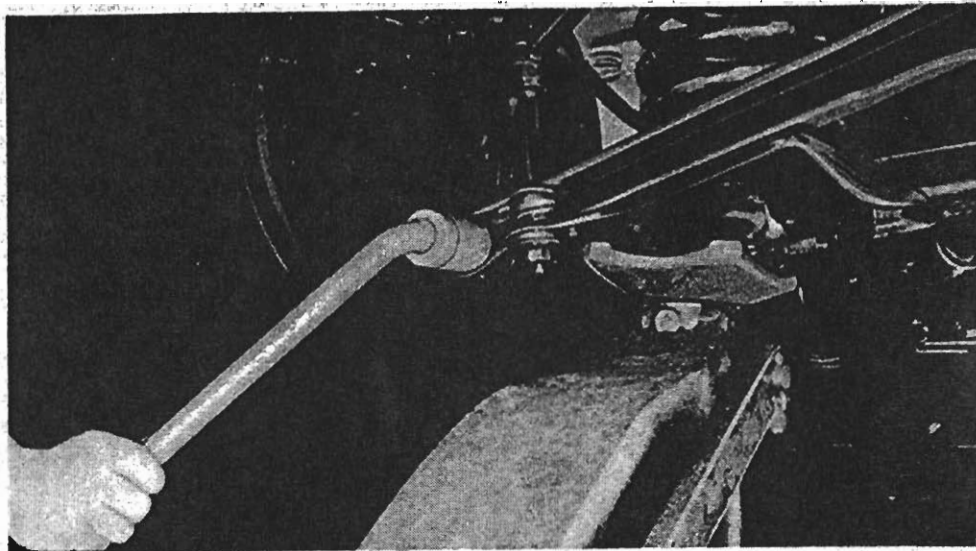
Removing the Knuckle Support Lower Pivot Pin.
